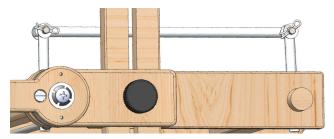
INSTALL THE METAL TRANSFER ROD
